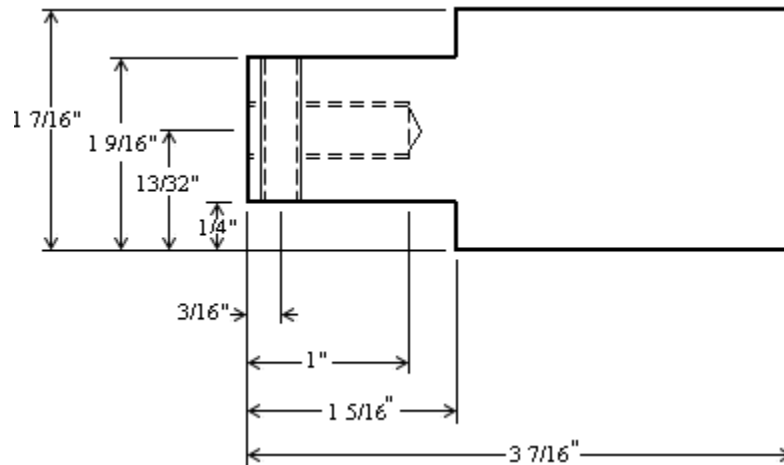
Bottom view of Hook-SH6 (dimensions in inches).
